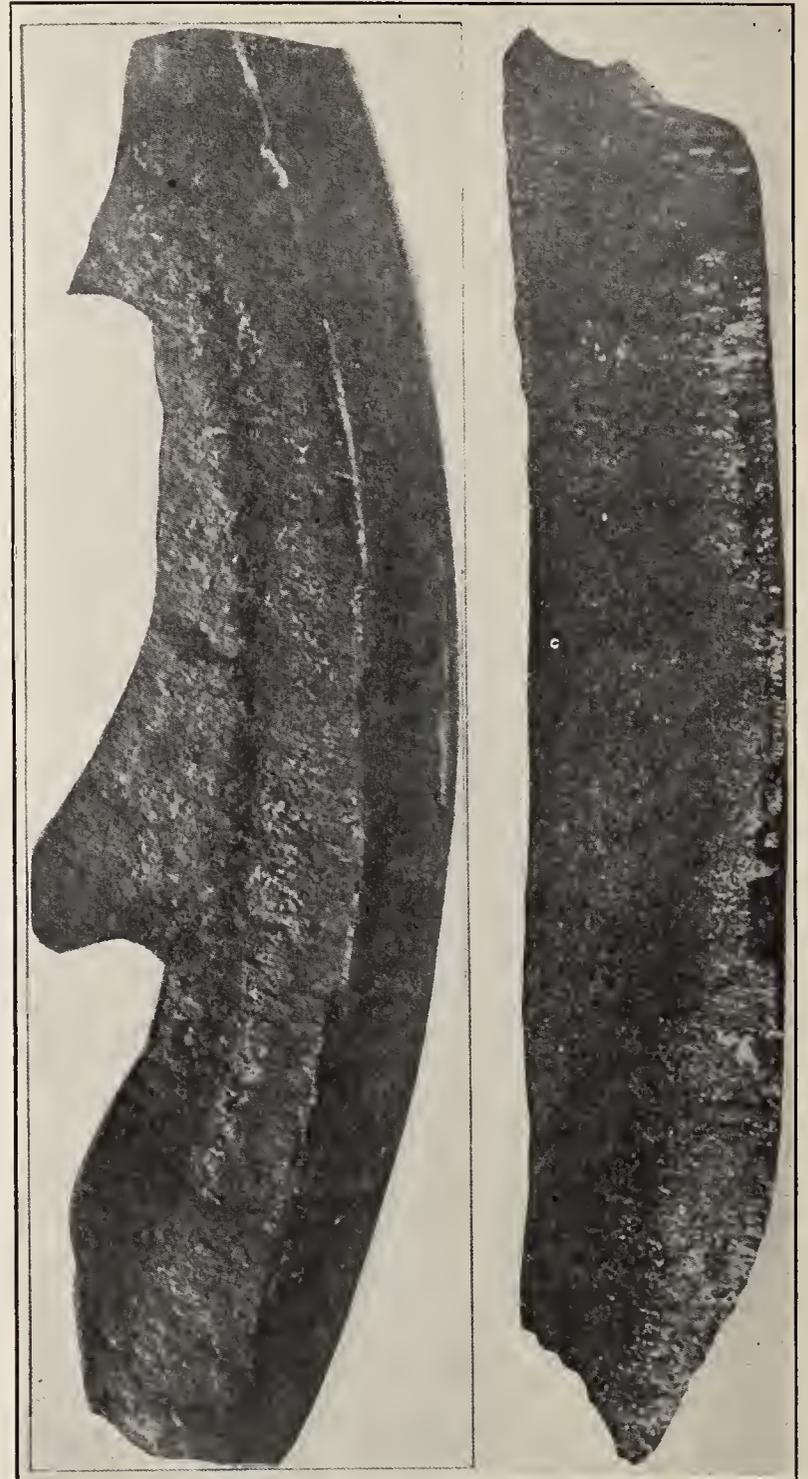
Seam Below Surface Fig. 6. Seam, Progressive Type—Blue Fracture
